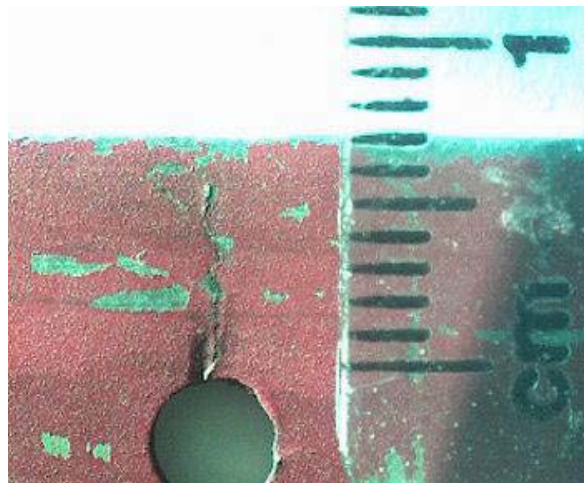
Sample of fatigue crack in bolt/rivet hole
